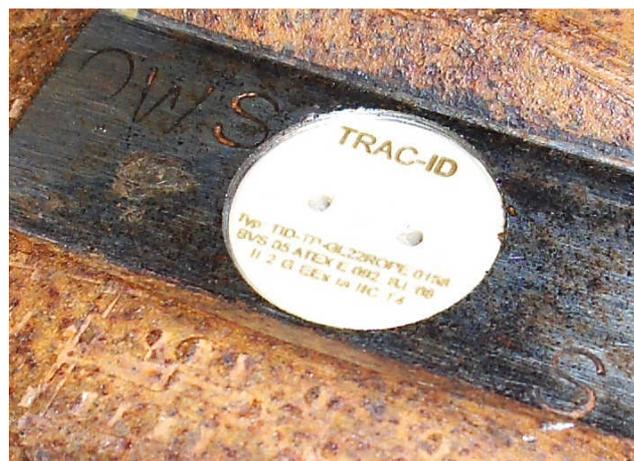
DOTS HPHT tubular tag, mounted in the pin tooljoint
